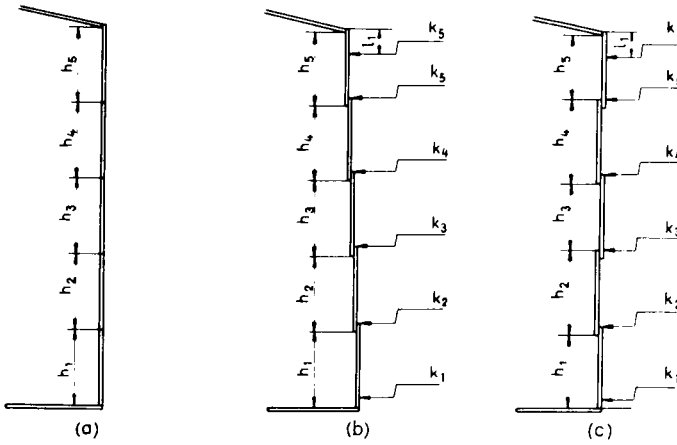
Hoop welding patterns of tanks (Petroleum . . . Oil 1955)
